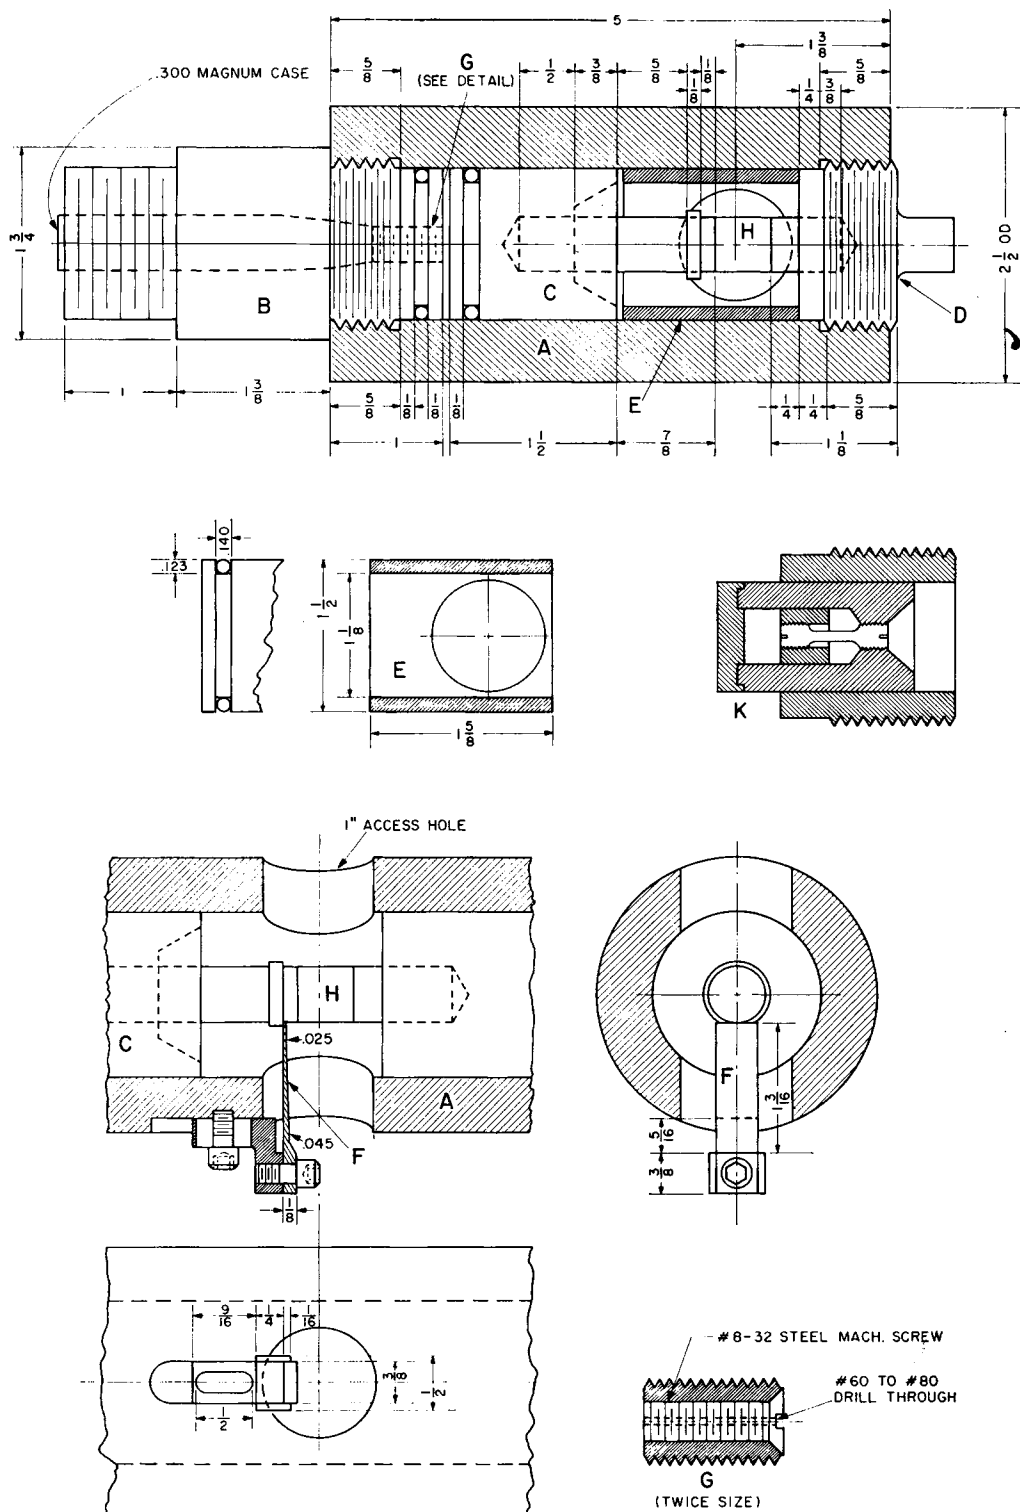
Details of gunpowder gas-pressurized machine. Note the adapter for small tensile specimens designated K.
